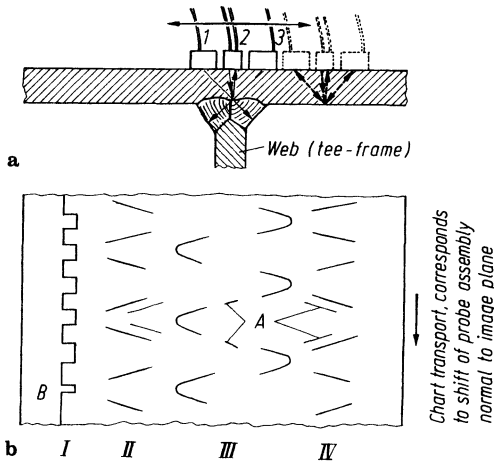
Automatic testing equipment for T-frame welds. a Arrangement of probes: *I* and *3* angle probes, *2* TR probe; b recording chart, schematic; *I* coupling check, *II* and *IV* recording traces of the angle probes, *III* recording trace of the TR probe, *A* indication of defect in joint, *B* indication of coupling failure of the angle probes
